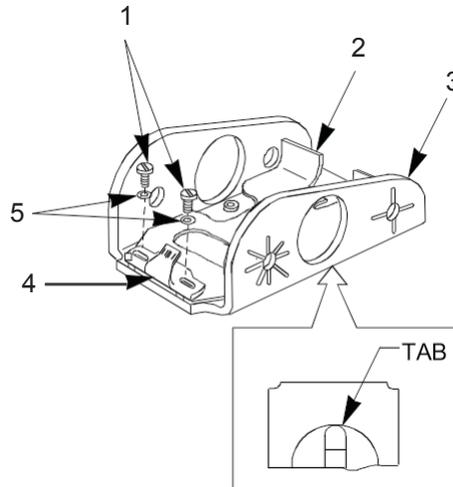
Slack Plate, Windage Scale, Rear Sight Base.
